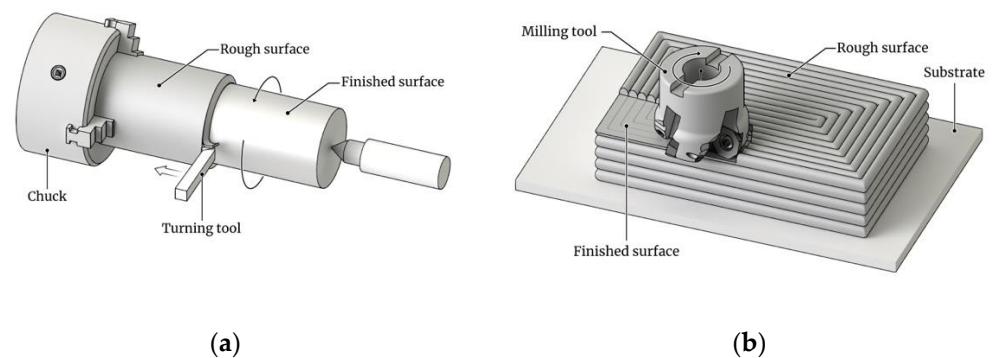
Blade machining processes implemented on metal-cutting machines: (a) is turning the outer cylindrical surface with a through cutter; (b) is milling the outer plane with a face mill.
